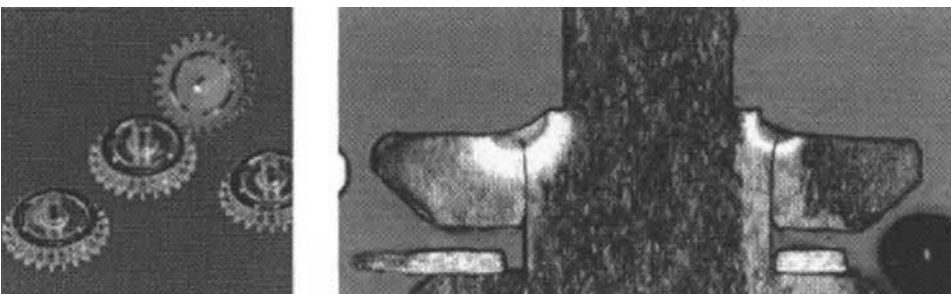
SHADOW welding of miniature ball bearings. Inner cage diameter, 0.6 mm (0.02 in.); outer cage diameter, 3.0 mm (0.1 in.). Source: Ref 49
